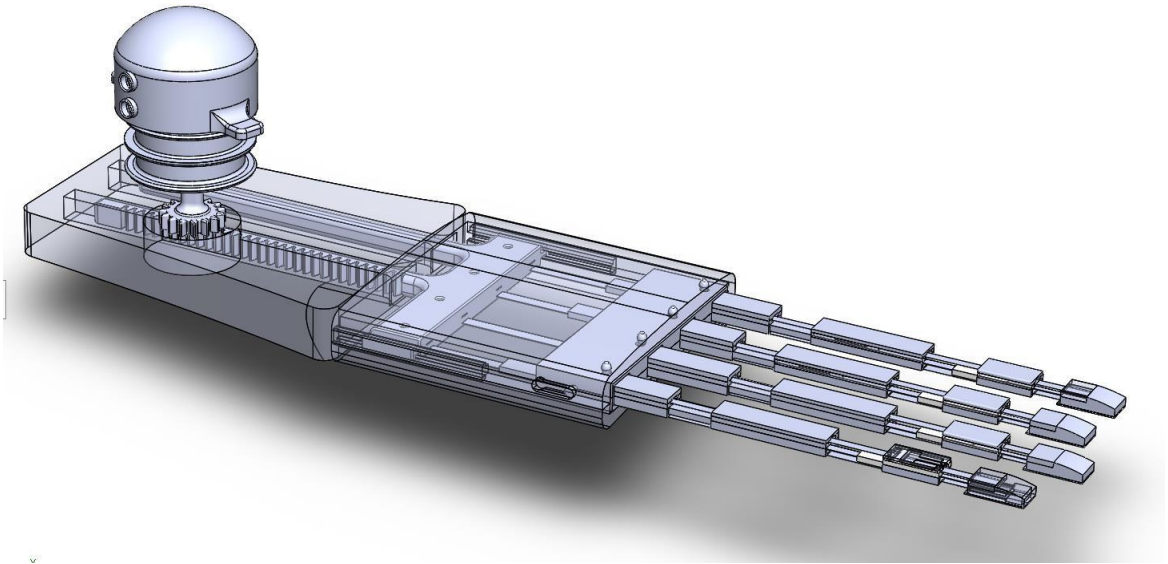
Final CAD Model: Hand Module, exploded and partial transparency
